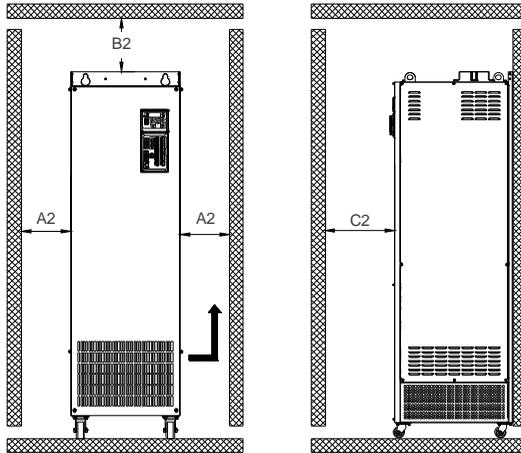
Mounting clearances for GK900M-4T250 to GK900M-4T450
